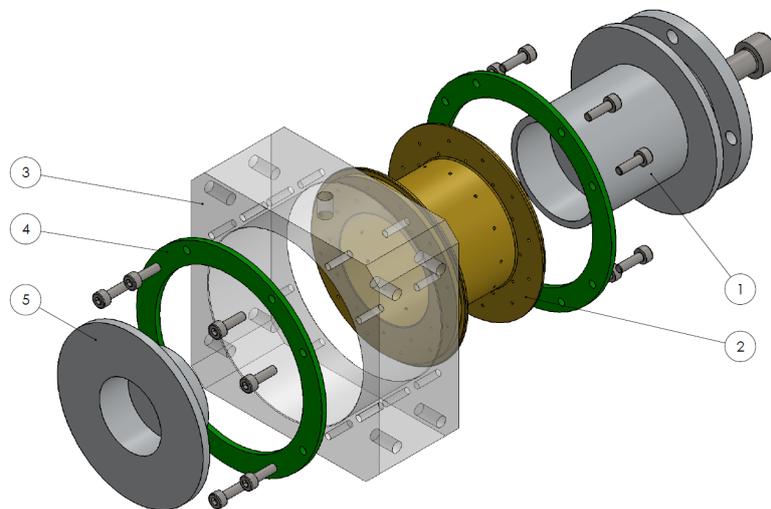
Exploded view drawing of the rotational air bearing: (1) internal tube with traverse support, (2) bearing bush, (3) housing, (4) bush stop and (5) element that restrains axial motion and controls lateral clearance.
